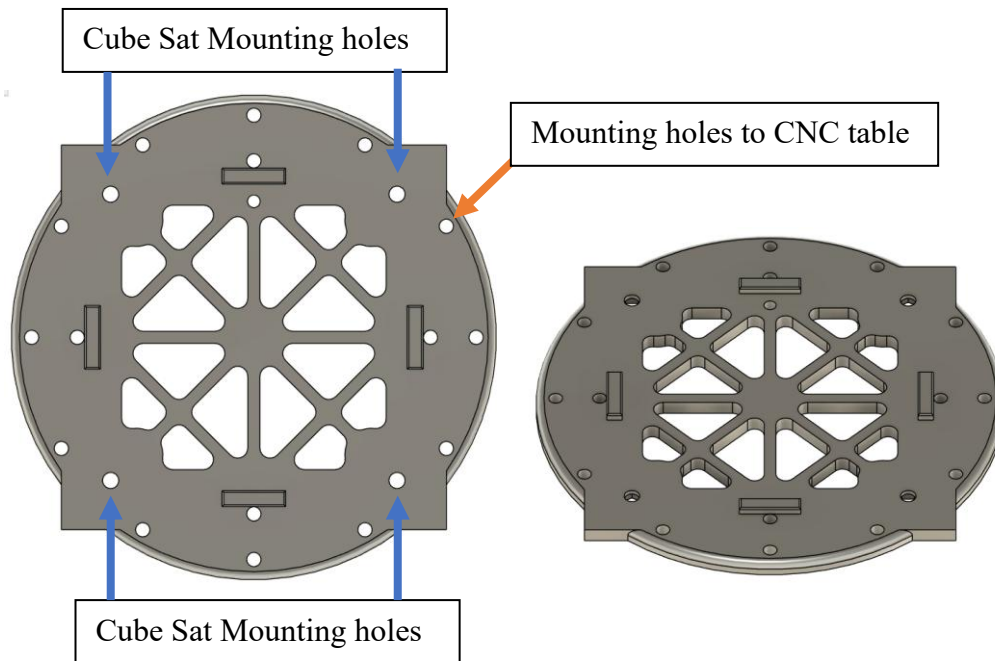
Cube sat hybrid mill table mount CAD rendering.
